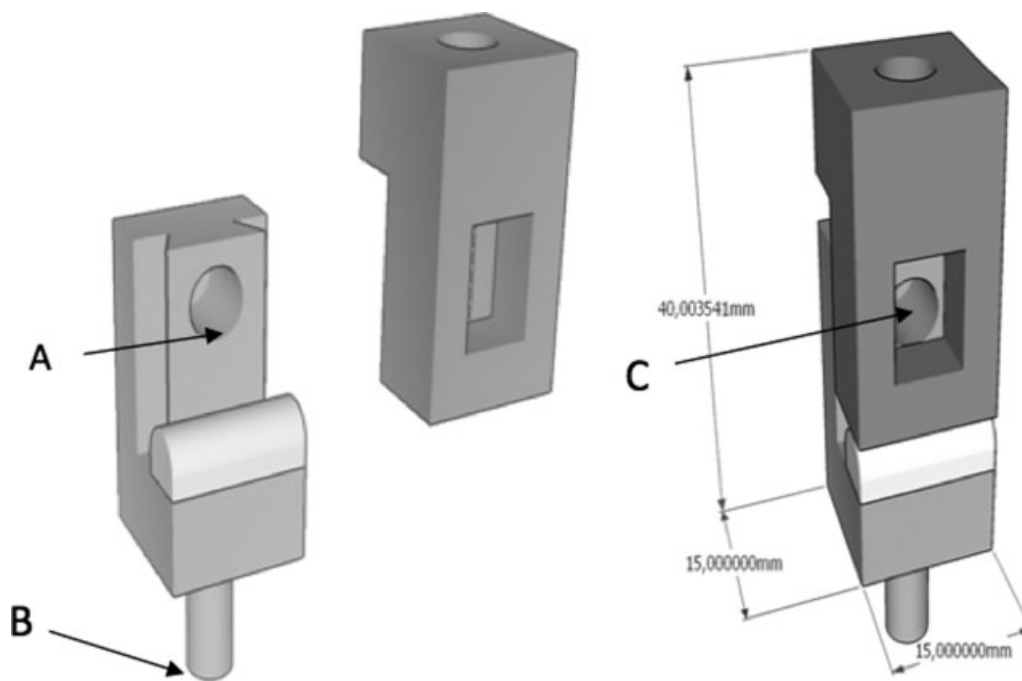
Geometric modeling. (A) Dovetail slide. (B) Threaded rod. (C) Bolt hole.
